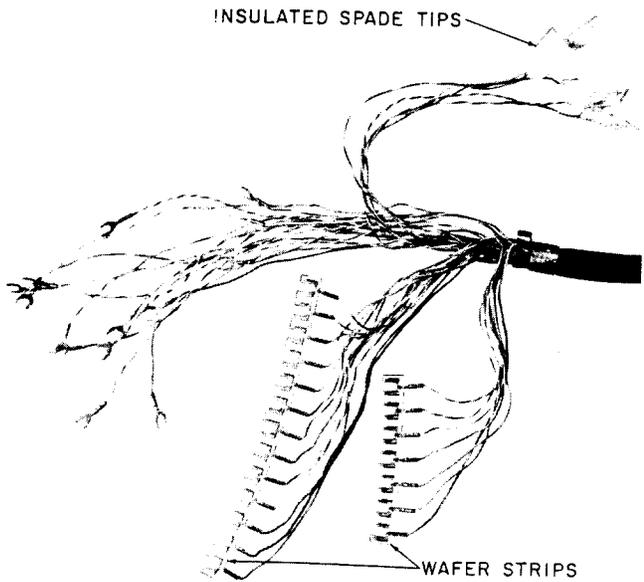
Set End of Mounting Cord Used With 589-Type Keys
